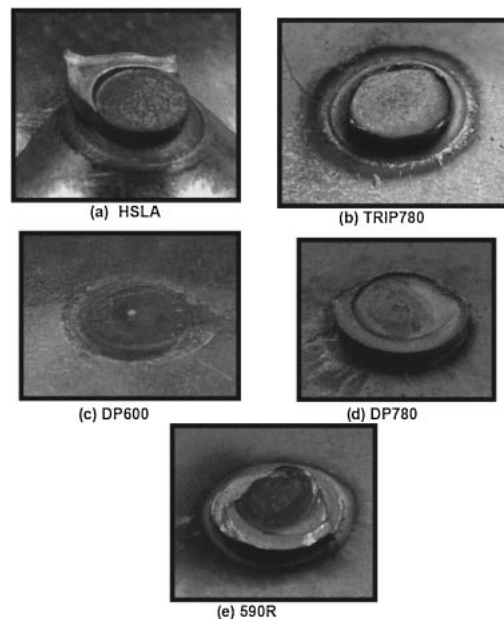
Fracture surface for overlap tensile shear specimens.
